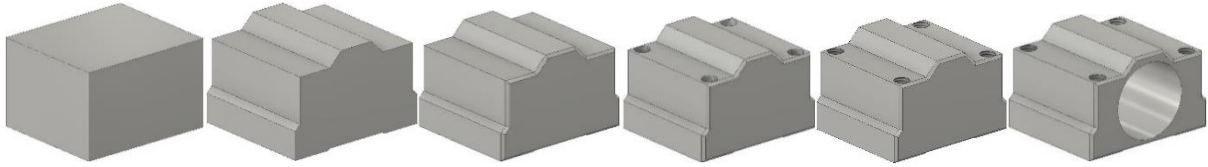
Machining Process of the Slider Bearing shown in [86]
